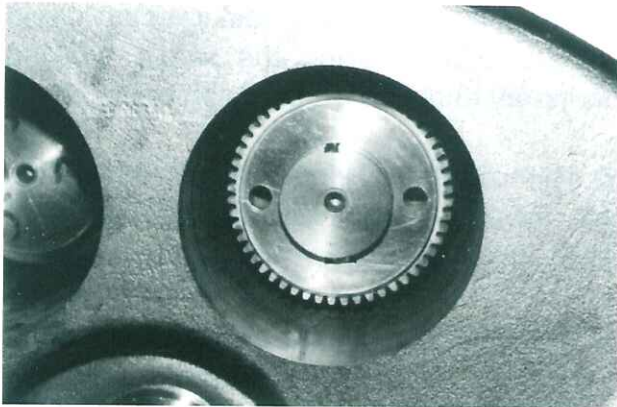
Tapped Holes on High-stage side Gear Coupling Hub for Pulling Out Hub
